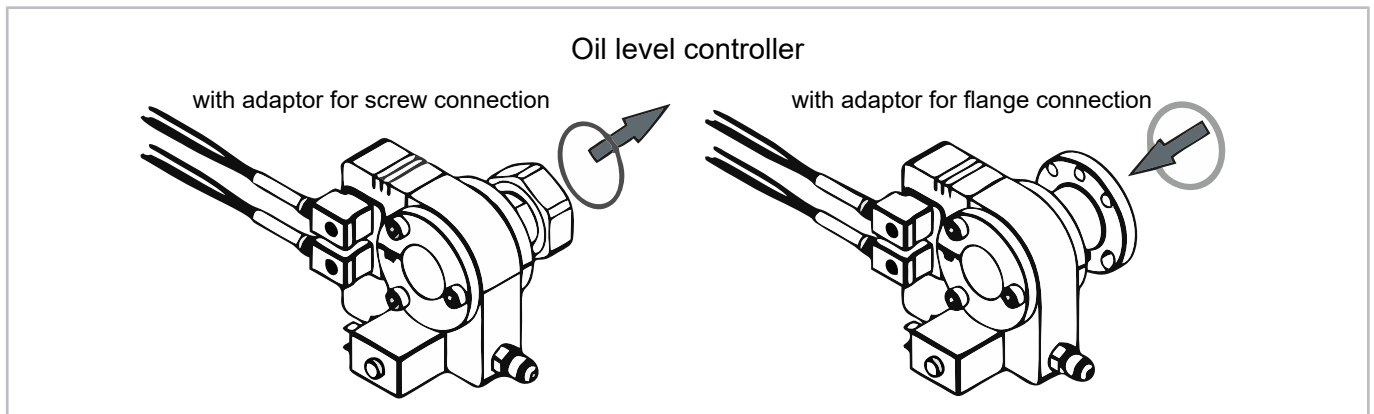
Examples of oil level controllers for screwed and flanged connections (source: Armaturenwerk Altenburg, AWA)
